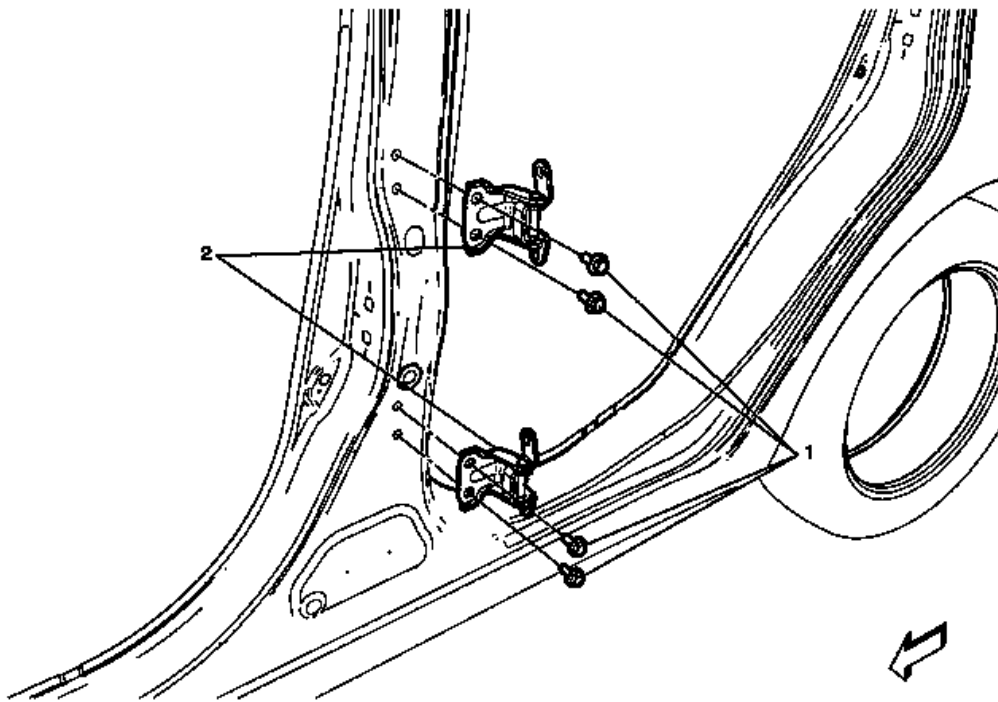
Rear Side Door Upper Hinge and Lower Hinge
